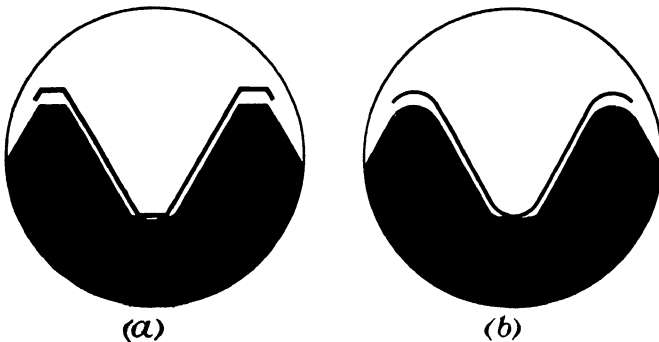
EXAMPLES OF WHEEL-FORM BREAKDOWN
